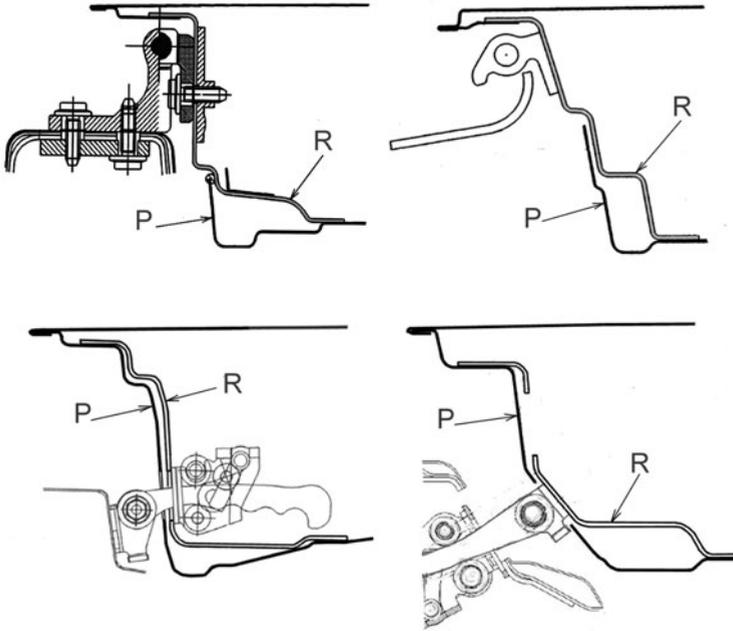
Door pillar section on hinges and door brake fittings. P: door inner panel; R: pillar reinforcement. It can be noticed that hinges are usually welded or screwed to reinforcement only, while door brakes, in case of reinforcement deflection, can also load the inner panel.
